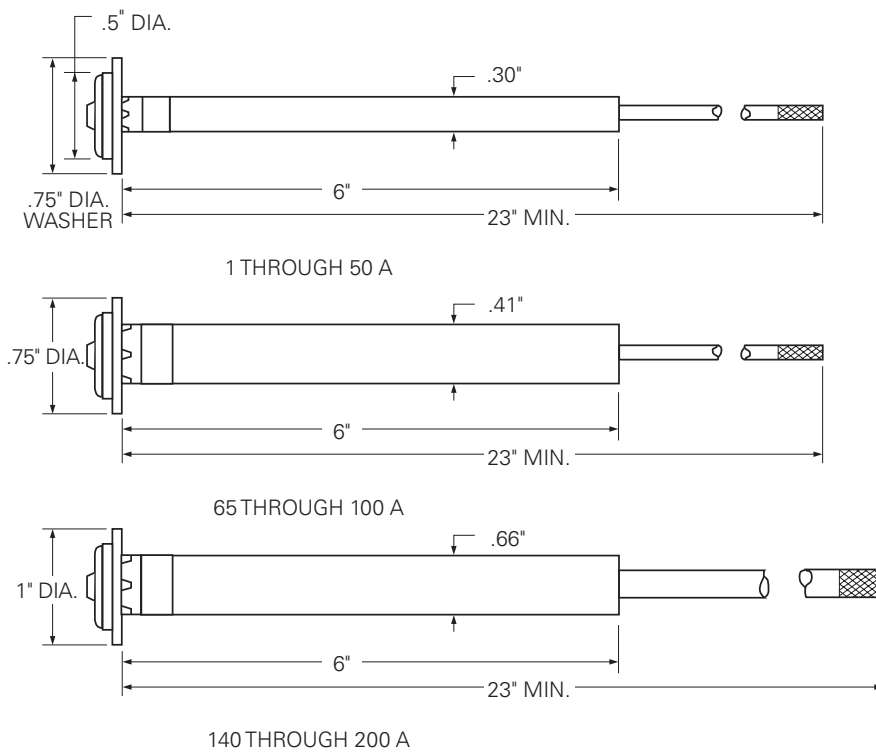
Dimensions of typical Types D, H, K, T, Type 200, N Edison fuse links (Removable buttonhead shown; non-removable buttonhead dimensions are similar).
